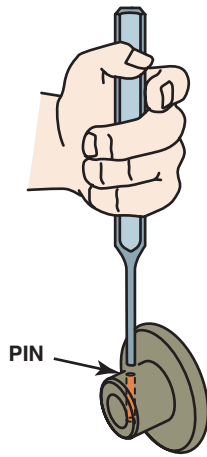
A punch used to drive pins from assembled components. This type of punch is also called a pin punch.
